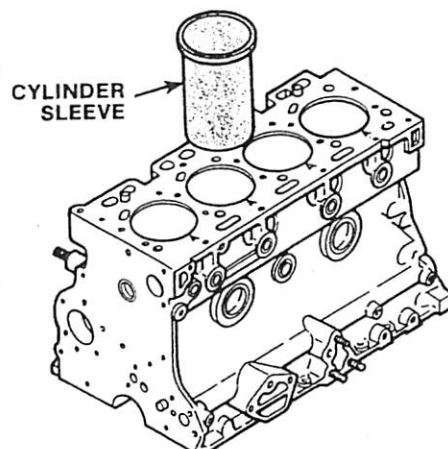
A cylinder sleeve is fitted into the bore to serve as a wear surface for the piston rings.
